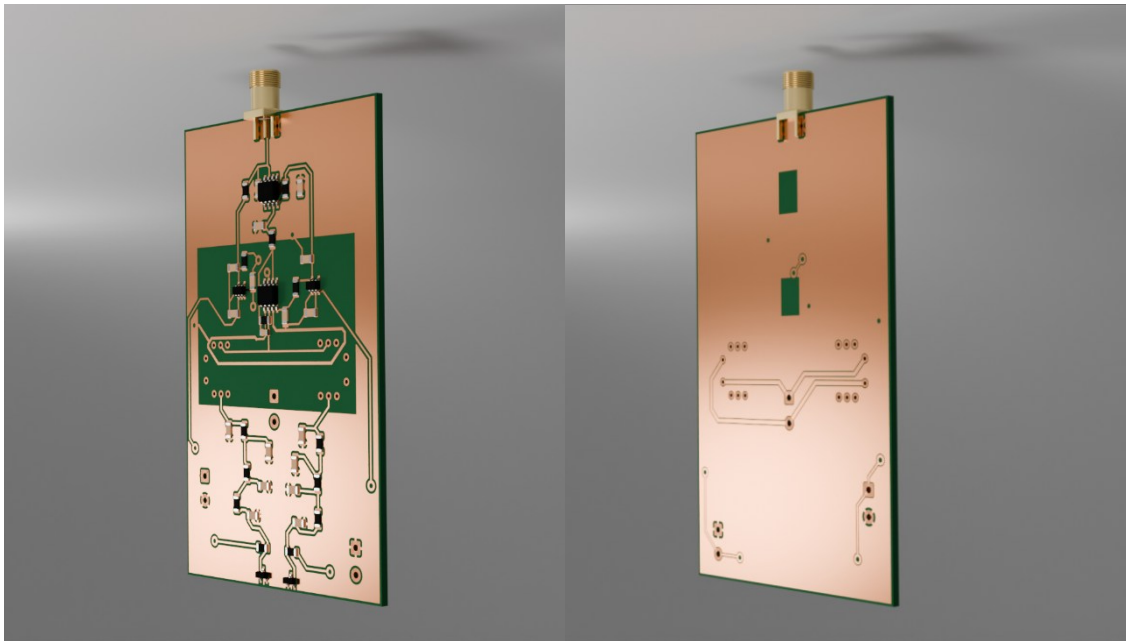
3D photorealistic renders of final PCB layout, showing both sides of the TIA board.
